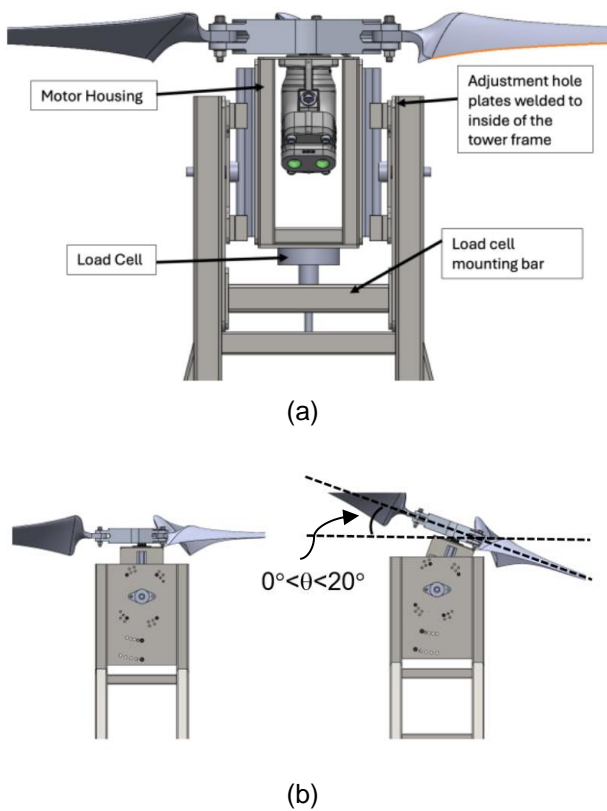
Test frame adjustability of the pitch angle of the rotor and motor mounting, (a) front view (b) side view.
